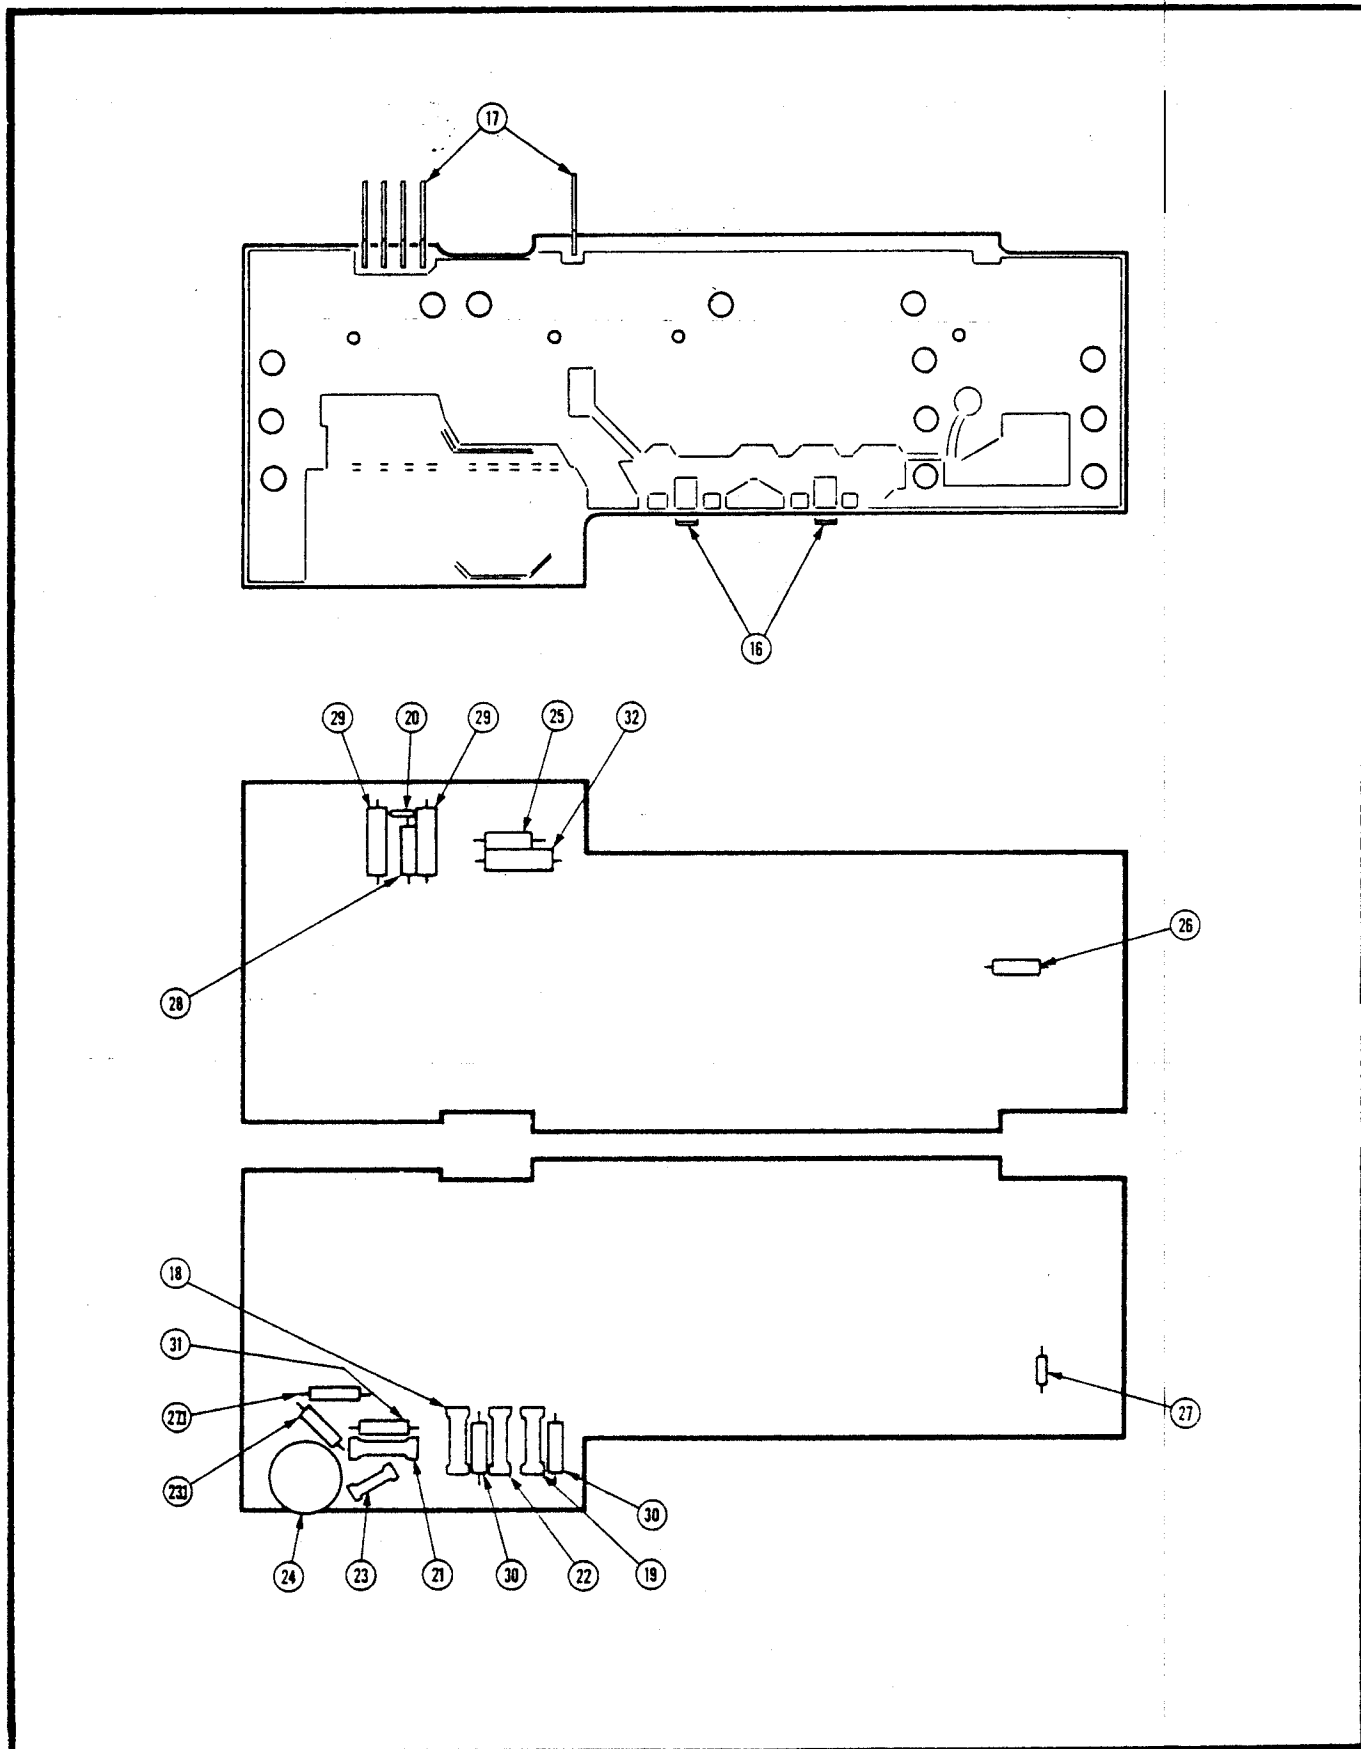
A3 Circuit Board Assembly, Cam Switch, Channel 2 (sheet 2 of 2)
